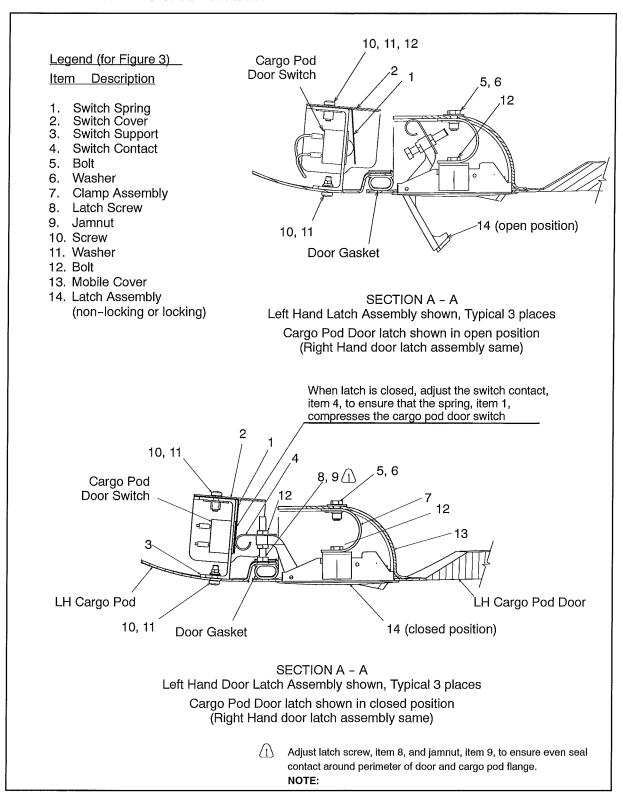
Cargo Pod Door Switch and Door Latch Assembly
